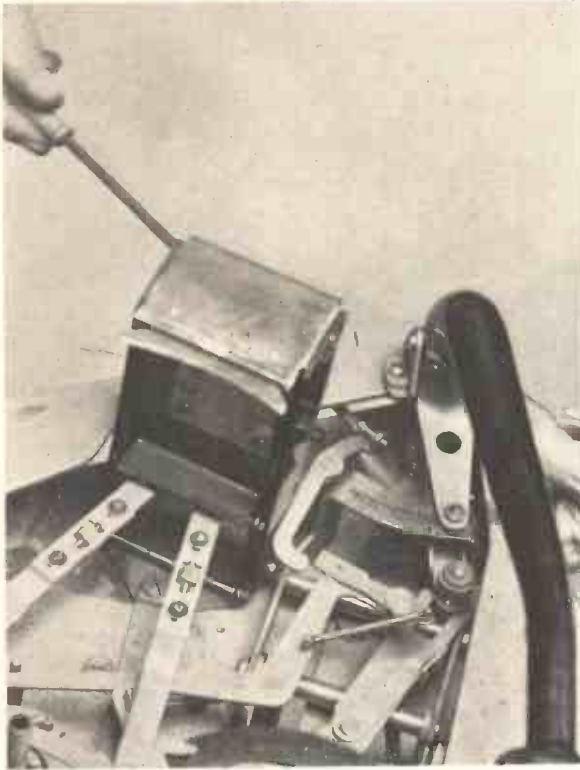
ADJUSTING THE INNER DIAMETER TRIP LEVER.
